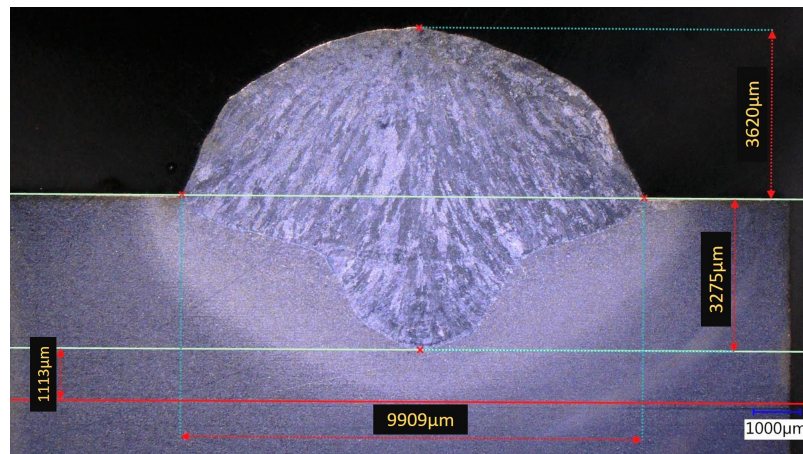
OC Weld Bead and its Dependent Parameters
